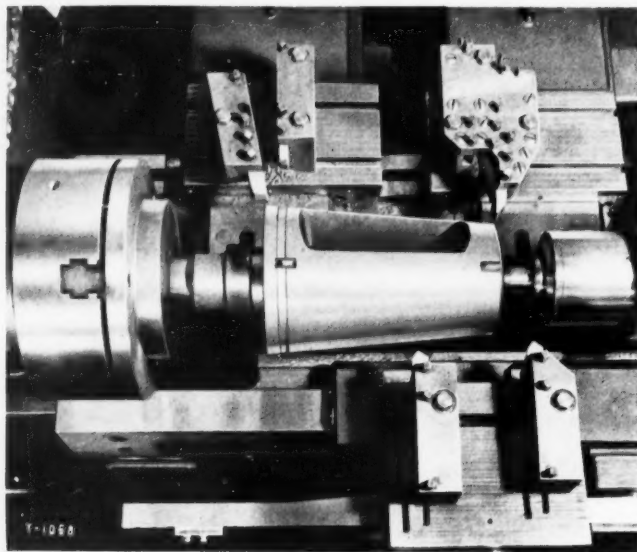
Close-up of tooling for turning taper, grooving, facing, and turning radius of tapered valve plug.
